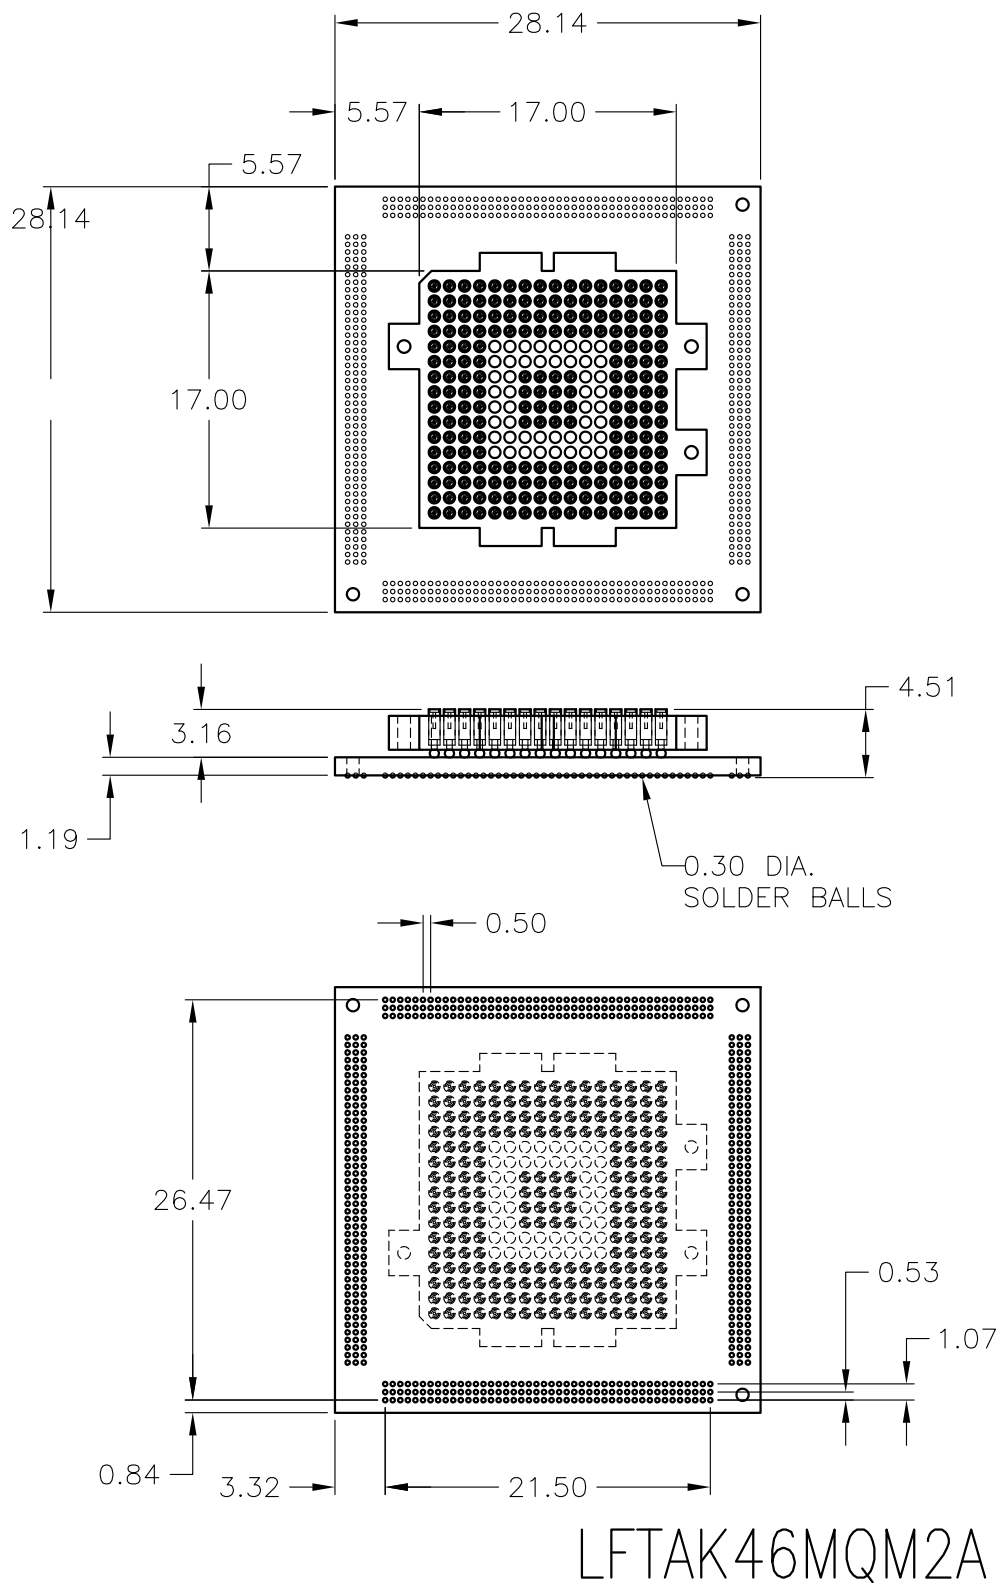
MPC5746R 208 BGA Trace Adapter dimensions (bottom)
